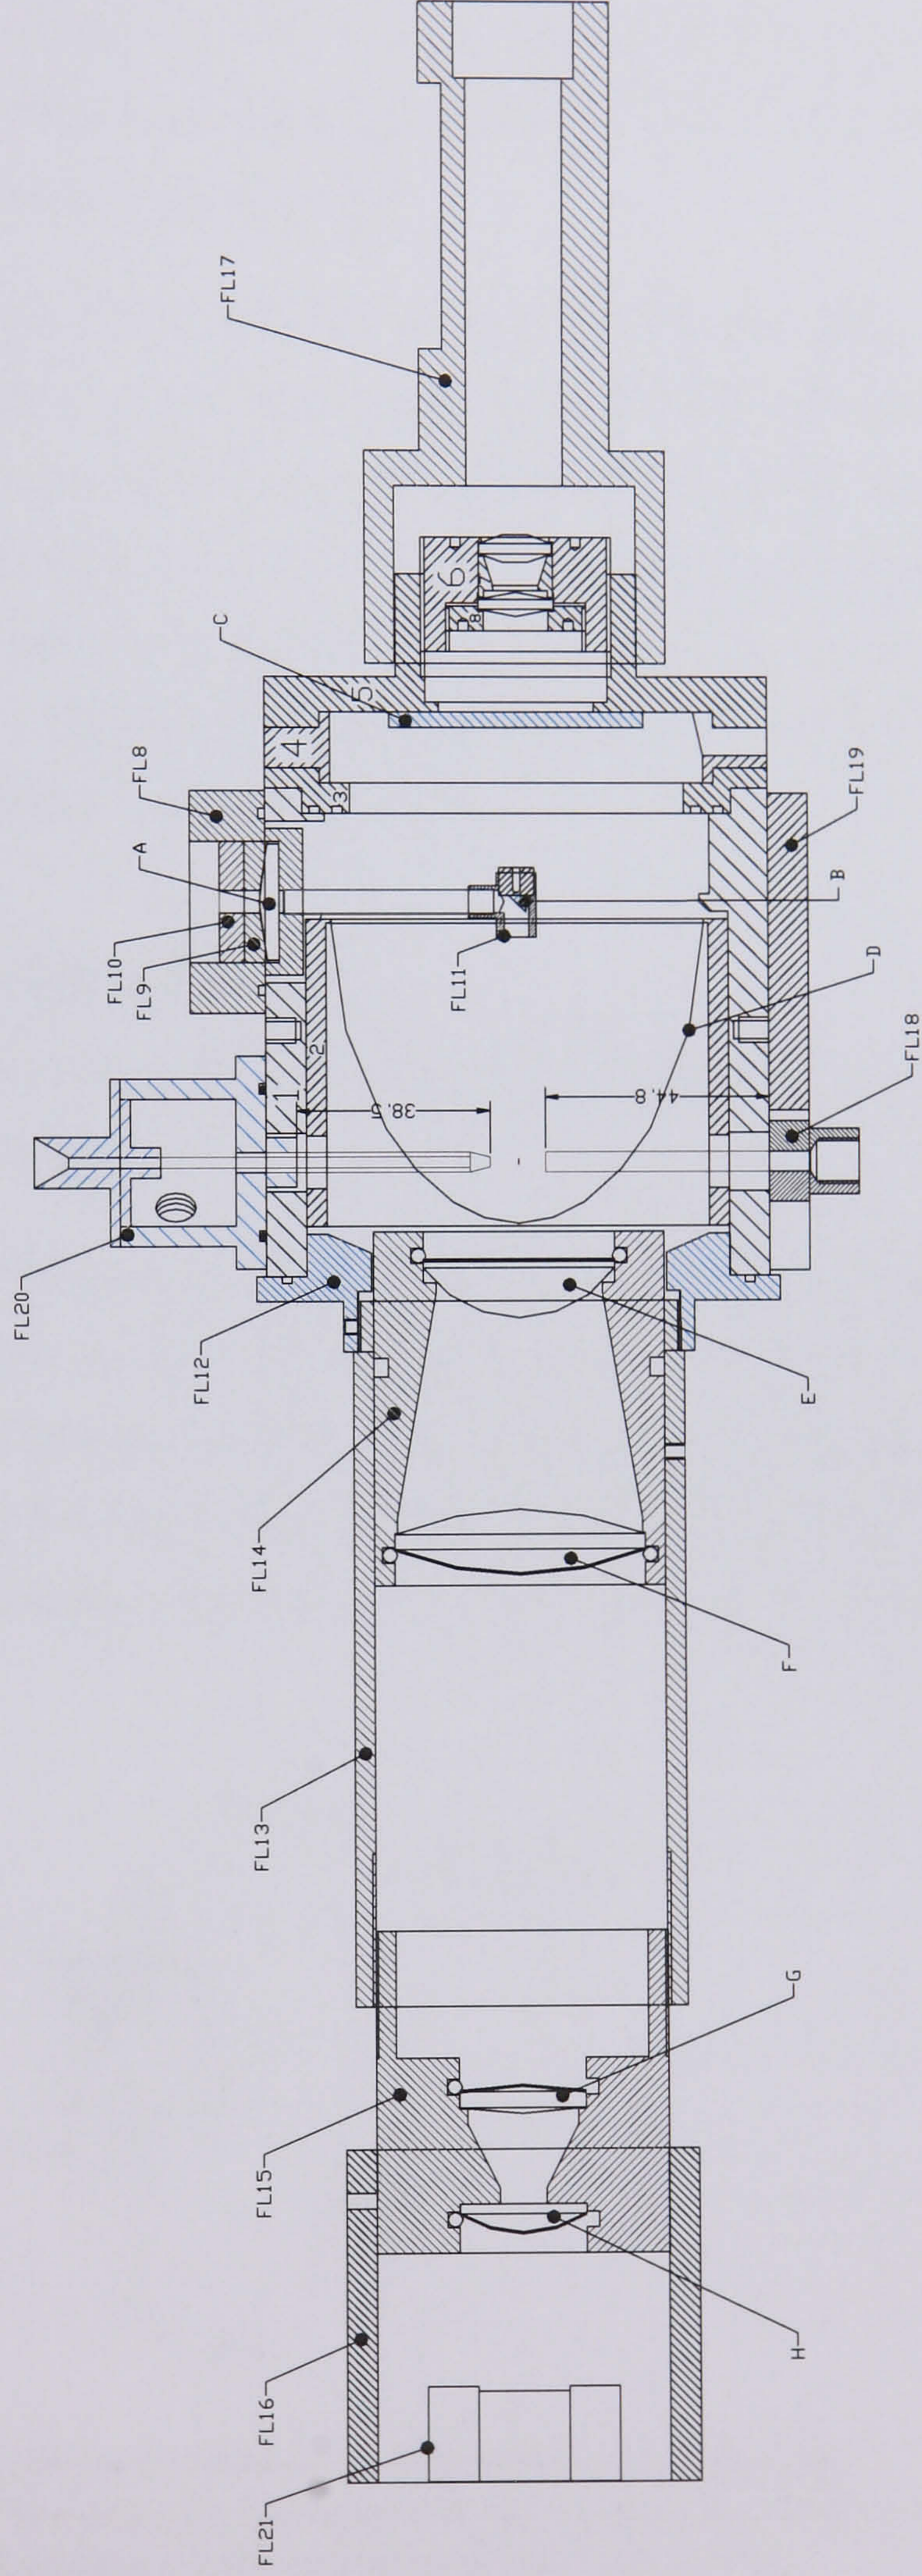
Mechanical assembly drawing of the chamber. For clarity the mechanical mounting components have not been shown.
